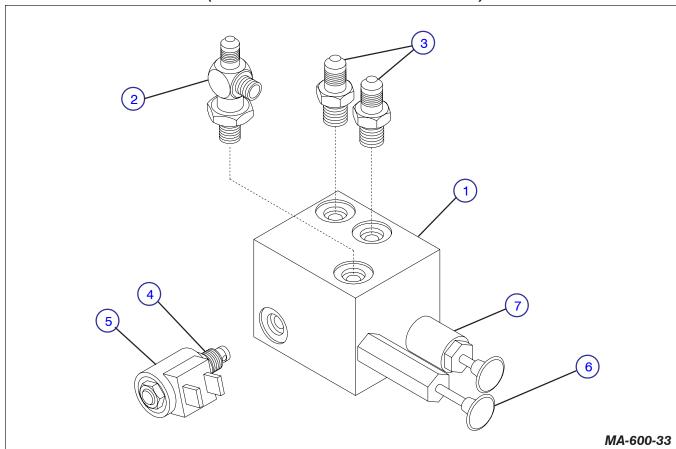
HYDRAULIC/ELECTRIC CABINET HYDRAULIC HOSE CONNECTIONS
